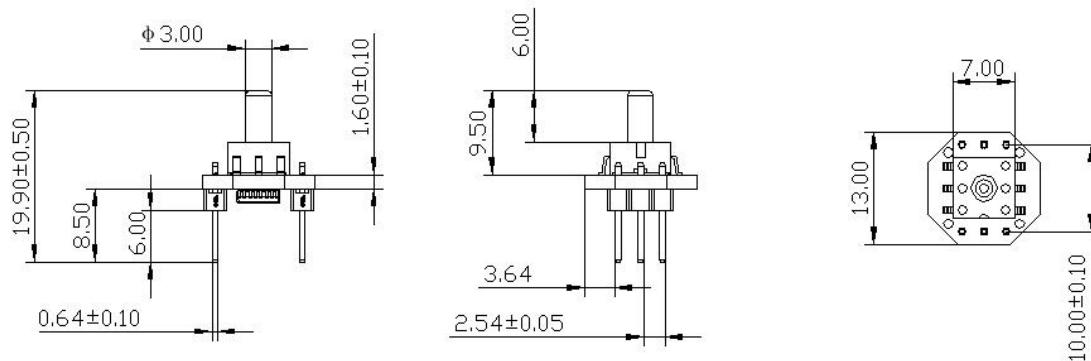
AGR12 dimension(unit: mm, tolerance:±0.20mm)
